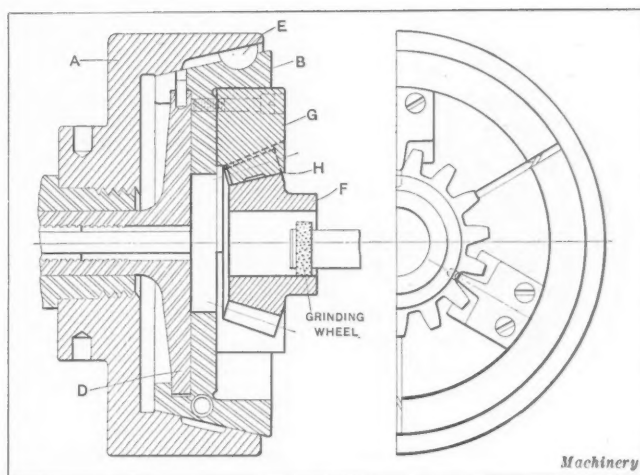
Draw-in Collet for holding Small Bevel Pinions by Means of Jaws which engage Bottom of Tooth Spaces
